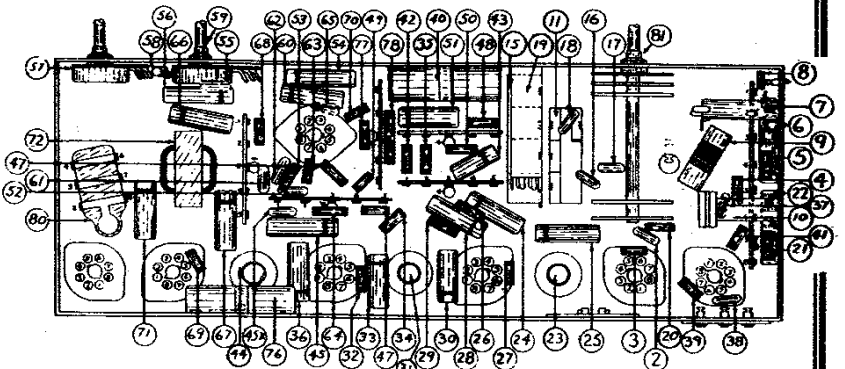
LOCATIONS OF PARTS—UNDER CHASSIS
